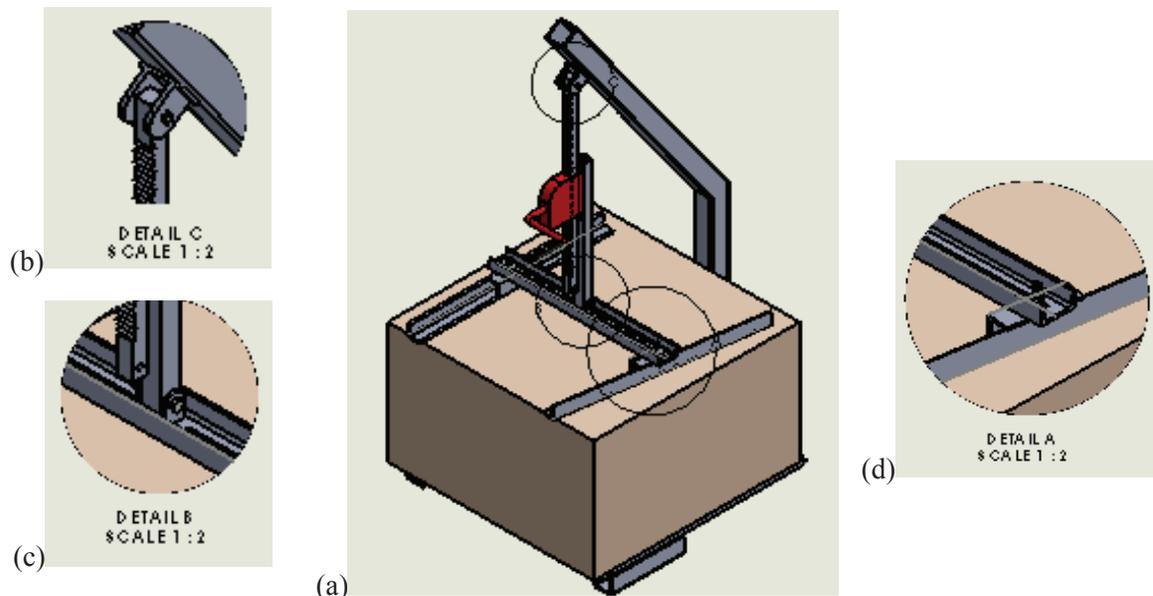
(a) Overall assembly of the “Rack and Pinion” sand mold clamping device. (b), (c), (d) Detail drawings as indicated in (a).
